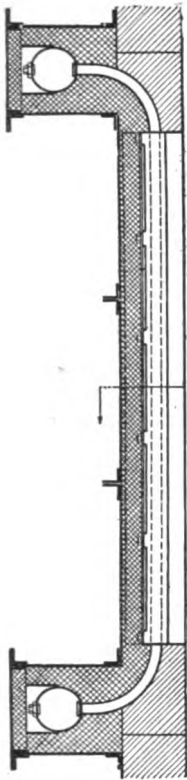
TYPICAL FOSTER R-H-A ELEMENT INSTALLED IN BOILER FURNACE WALL
